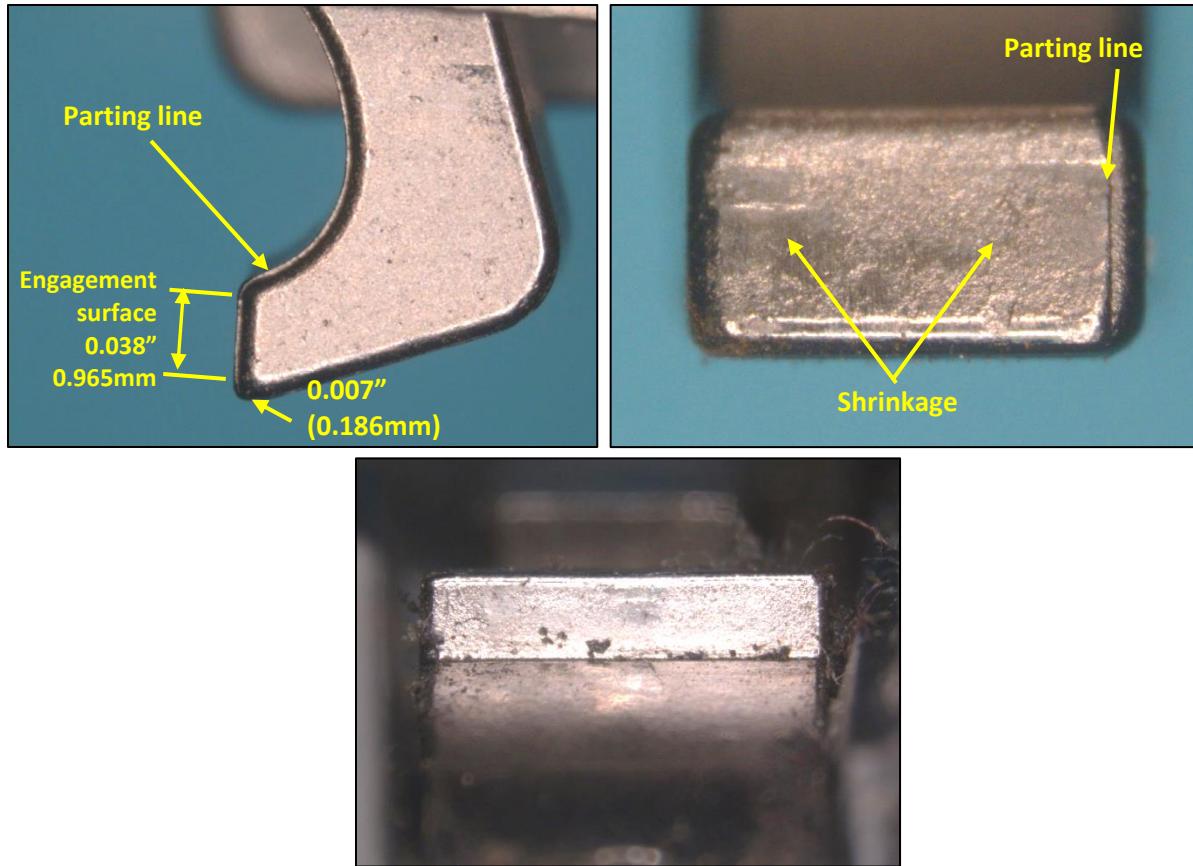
Striker foot area (upper left and right), Sear with rough surface and radius edges (lower)
